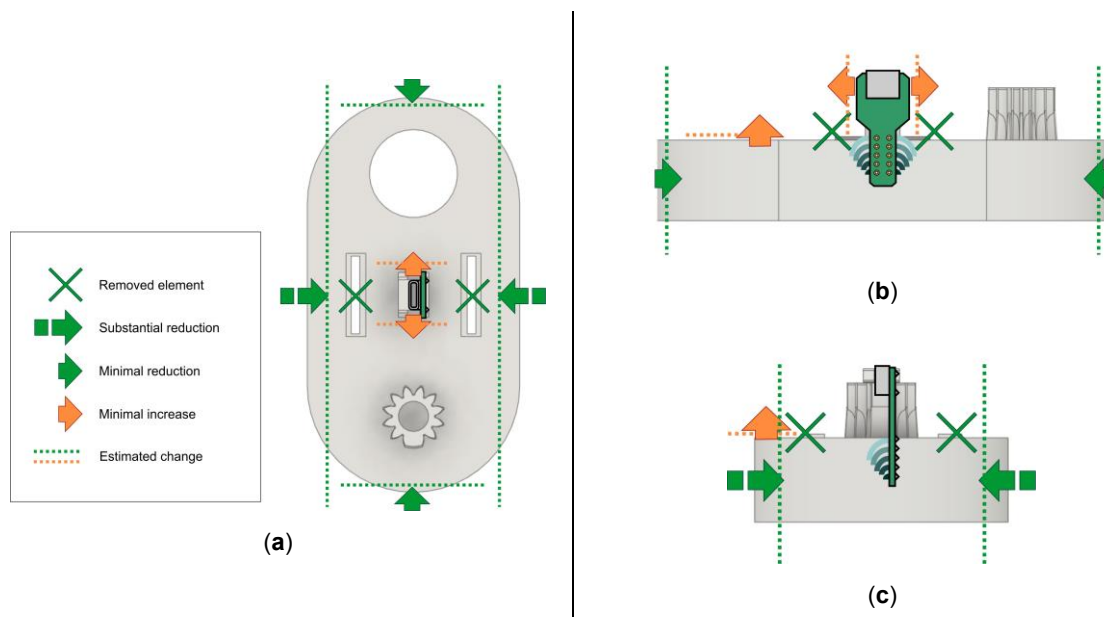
Illustration of the benefits of the proposed custom-designed USB-C breakout board design inside the latch hook of the resistance module : (a) top view; (b) side view; and (c) rear view.
